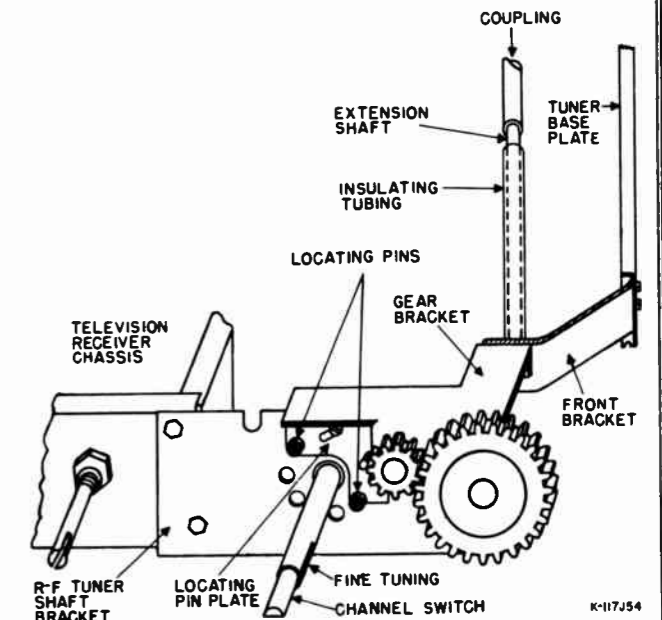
UHF-Tuner Front Assembly, 21-Models
